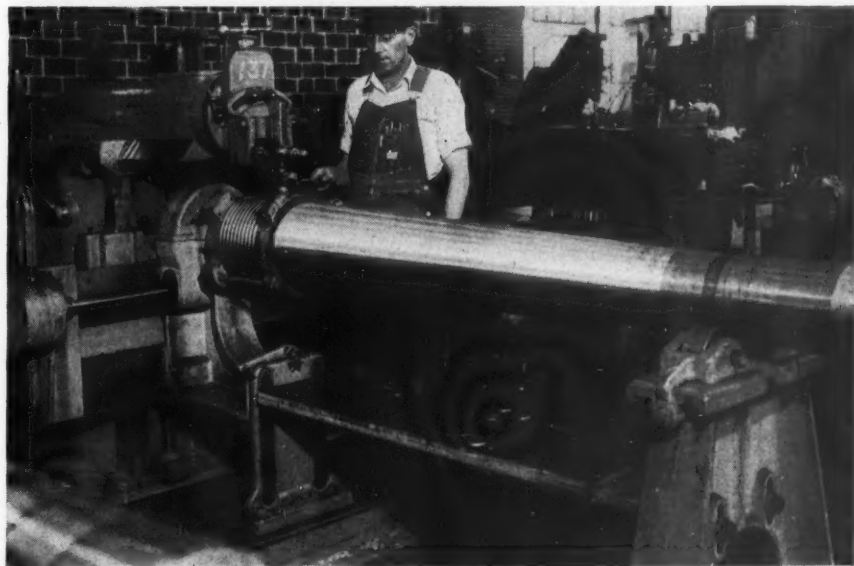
Using Shaper and Special Worm-Gear and Wheel Fixture for Sectoring Thread on Breech of 90 MM Gun
